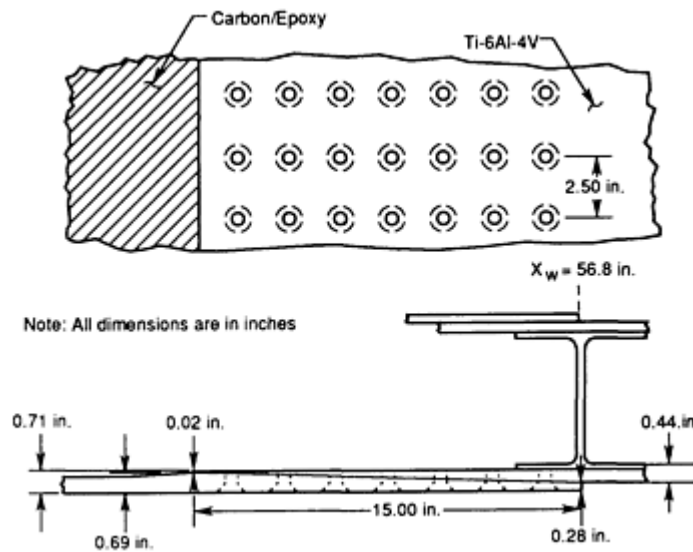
COMPOSITE-TO-METAL BOLTED JOINT CONCEPT. ORIGINAL SPECIMEN DIMENSIONS GIVEN IN INCHES
